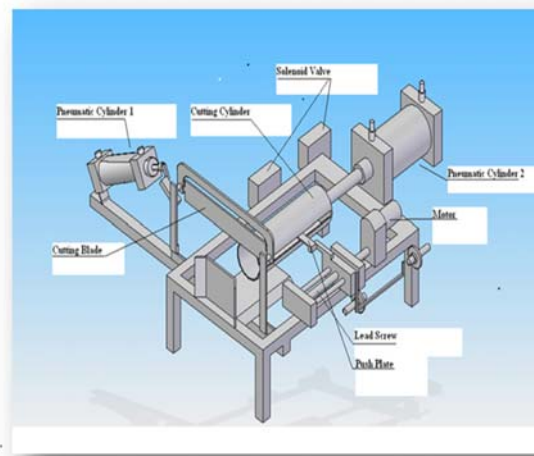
3D Drawing of Automated Pineapple Peeling and Slicing Machine
